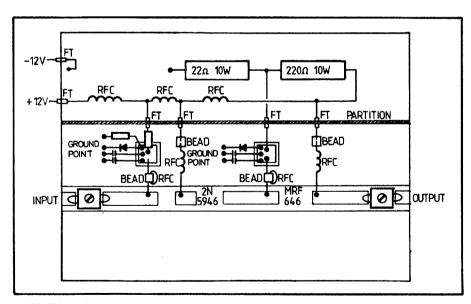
Layout of the printed-circuit board. Giass-epoxy board 1/32 inch thick is used, with one-ounce copper on both sides.
